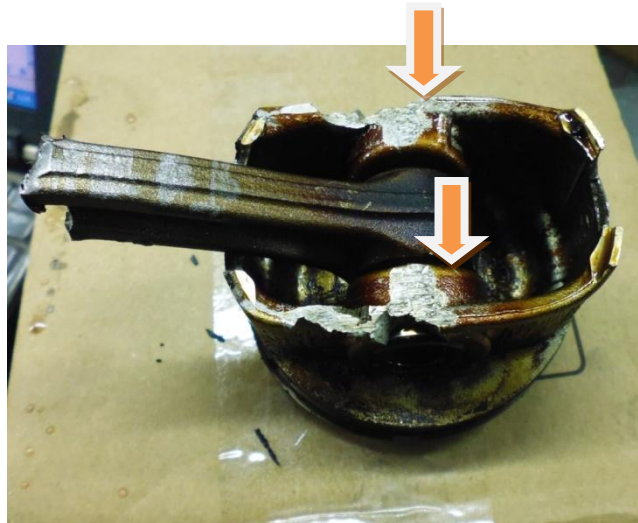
Damage to the piston bosses due to their abnormal contact with the crankshaft counterweights after shortening the connecting rod when hydrolock
